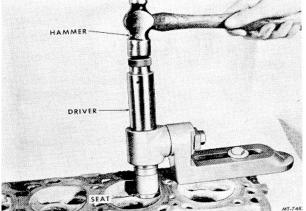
Using Insert Installer from Counterbore Tool Set SE1797 for Installing Inserts in Cylinder Head
